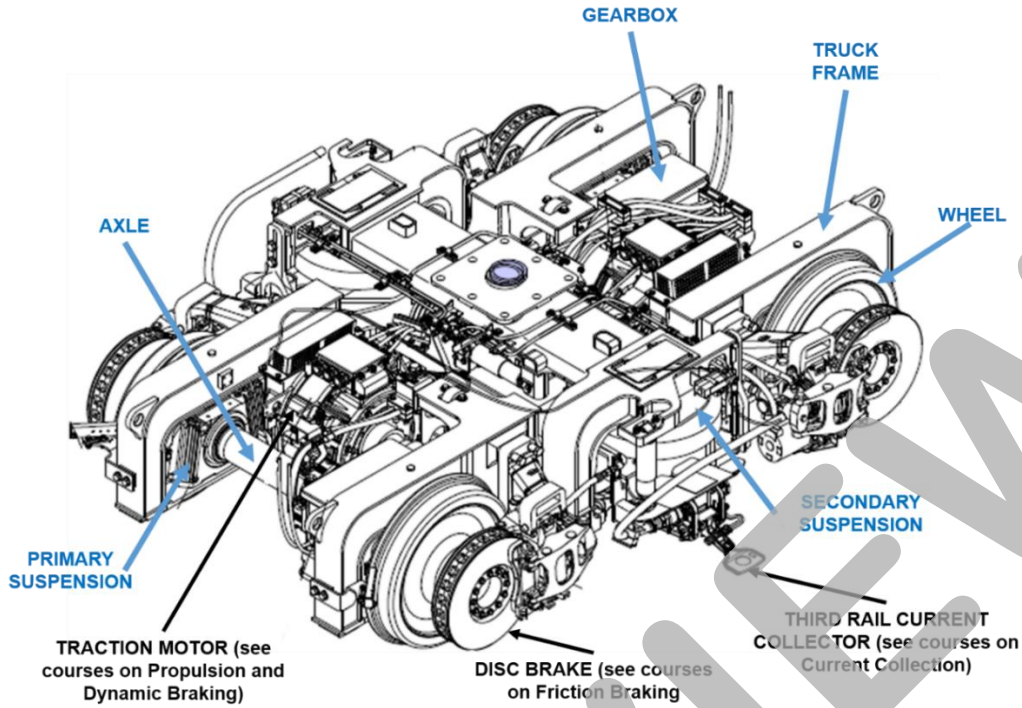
Frame, Suspension, Gearboxes, Axles on a Powered Truck Assembly –Courtesy WMATA
